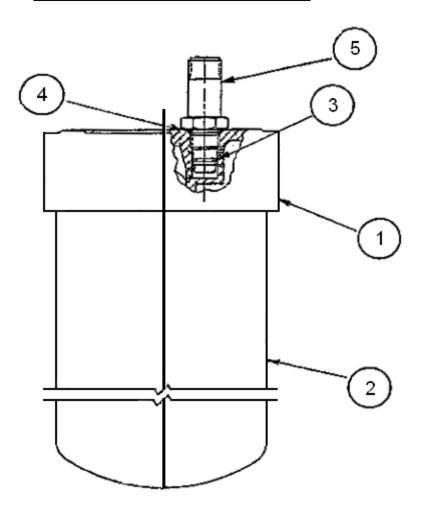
GD-00273-168[G] Discharge Filter Assembly
